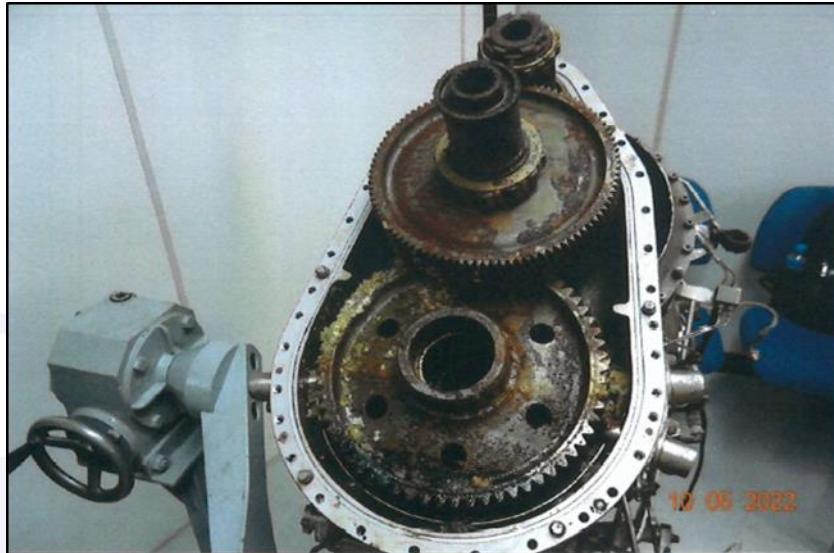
General view of the reduction gears of the module 05 of the SN 42326TEC engine.
